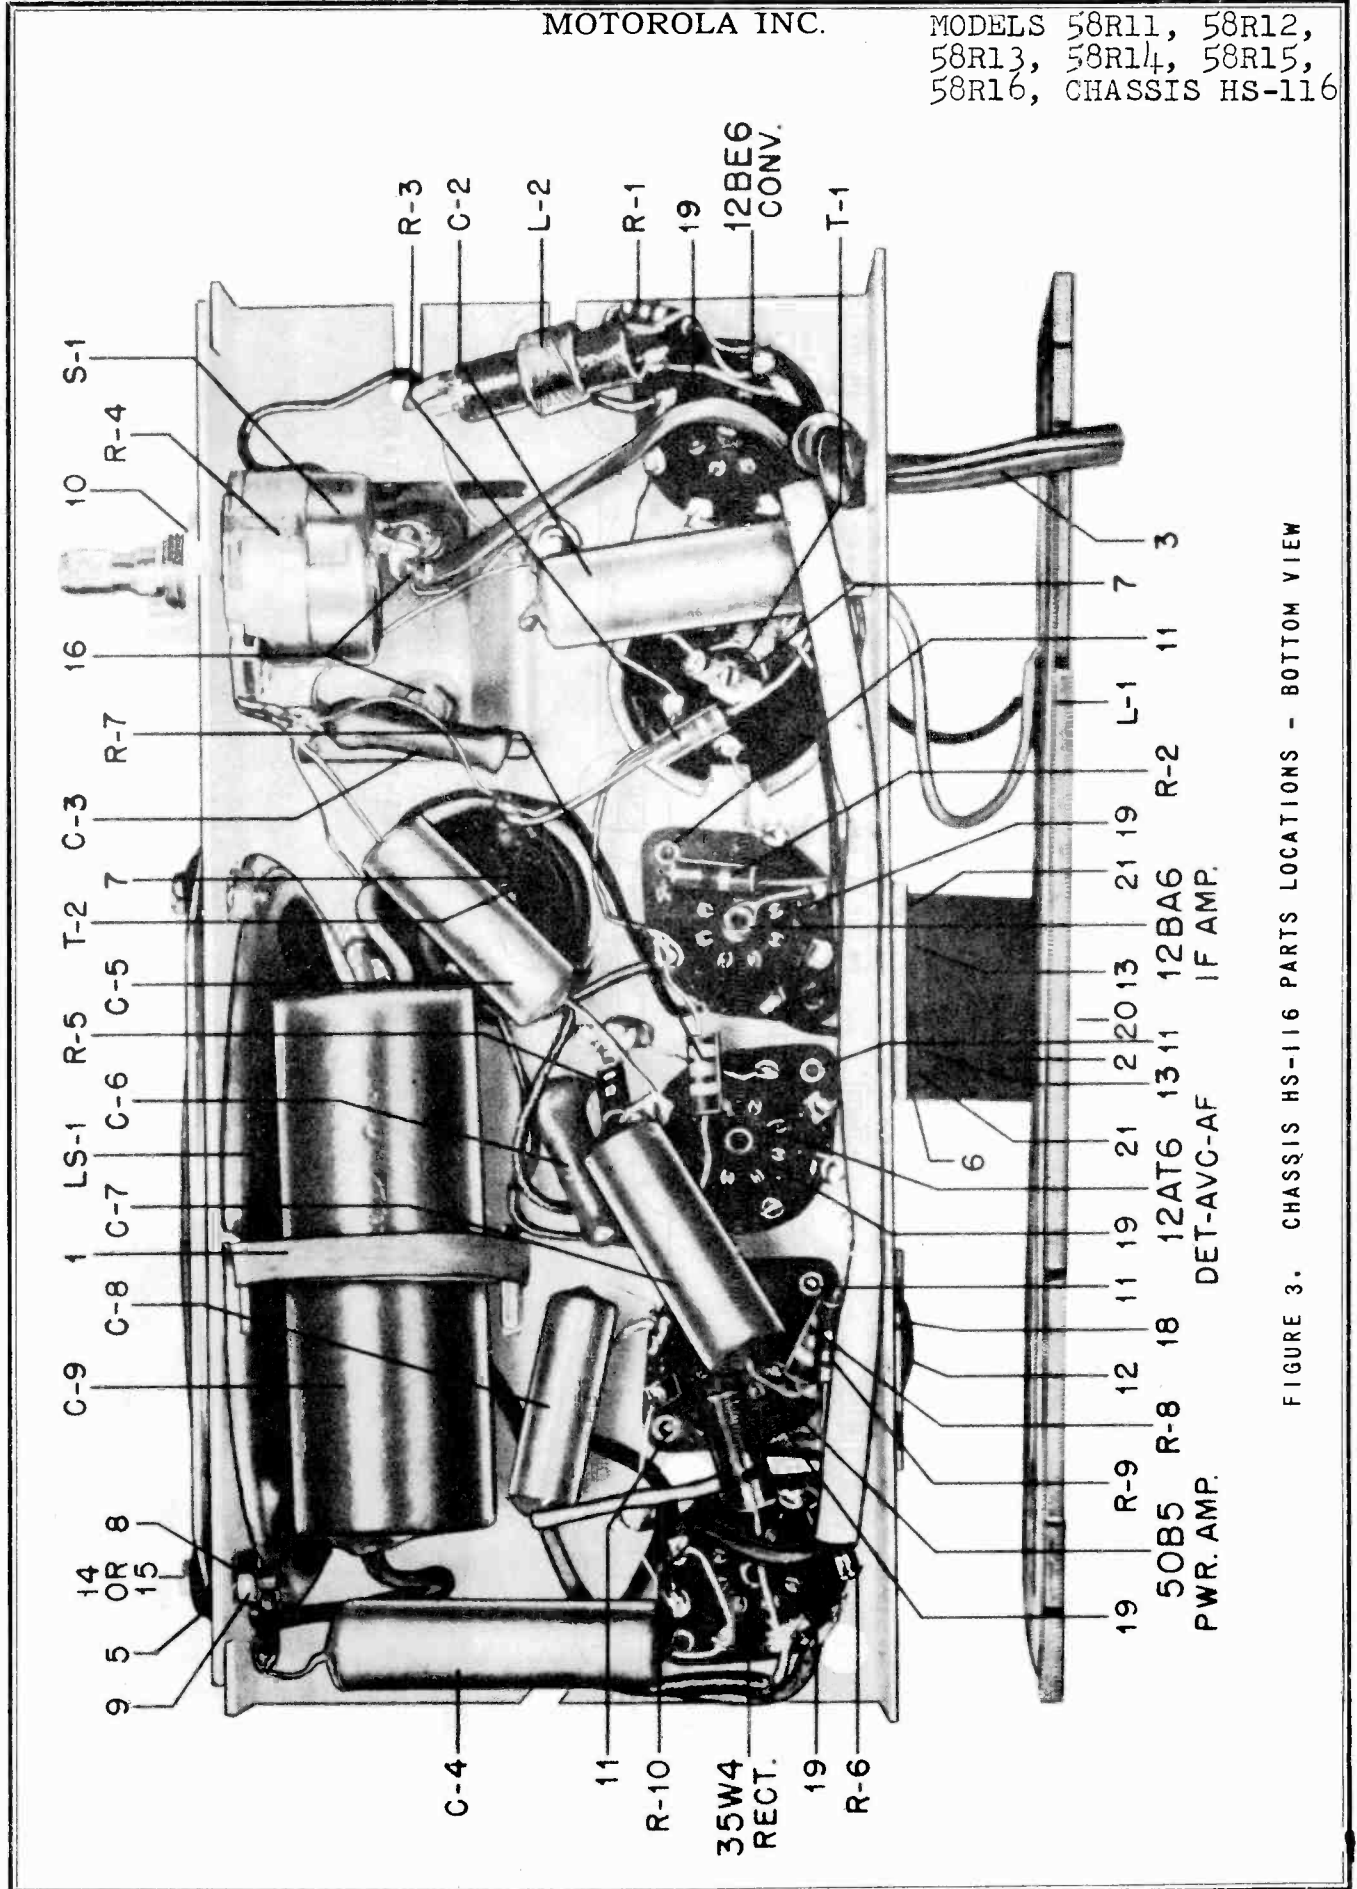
CHASSIS HS-116 PARTS LOCATIONS - BOTTOM VIEW
